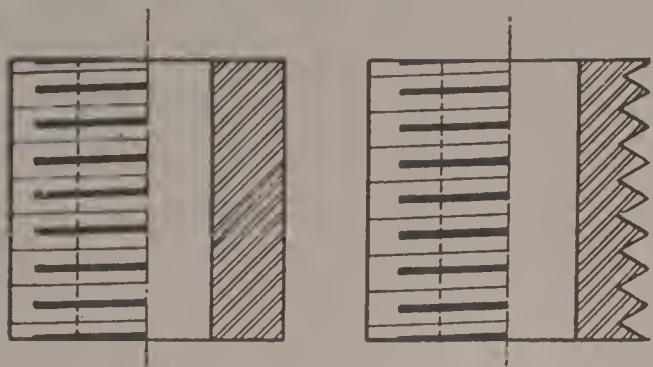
Conventional Drawing for Threads in Sectional Pieces
